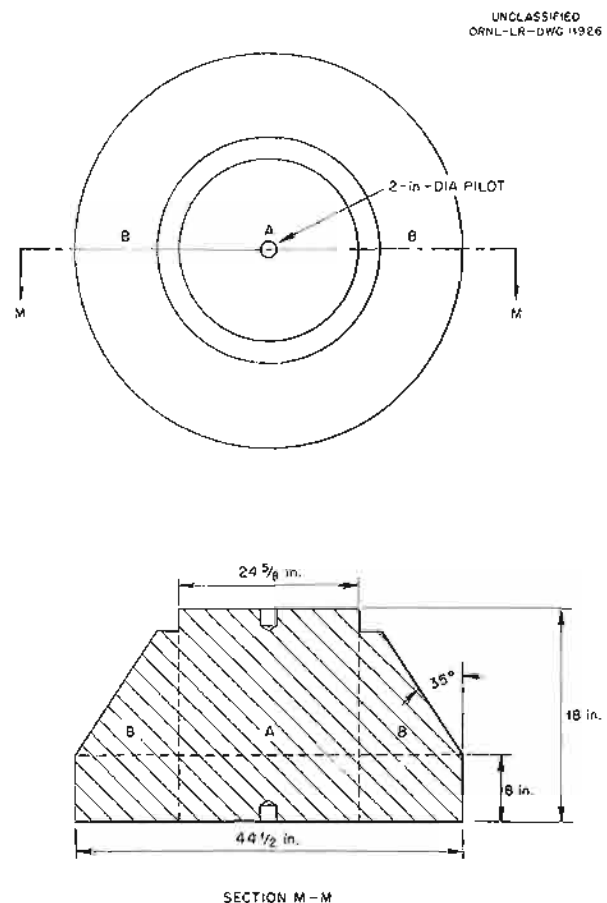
Cross Section of a Typical Hot-Pressed Beryllium Piece.
